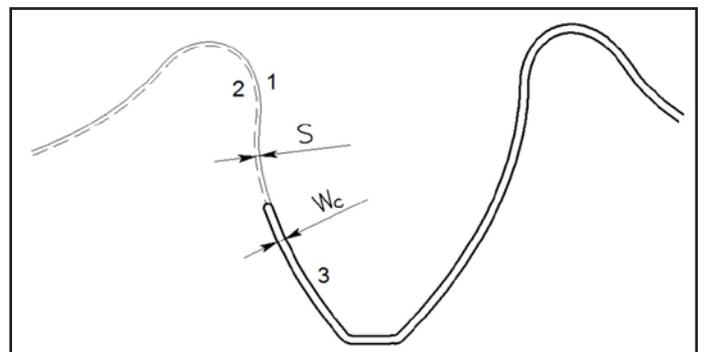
Contour cutting path: 1) nominal (average material condition) gear profile; 2) tool path; machined gear profile; W_c – cut width; S – tool path off-set.
